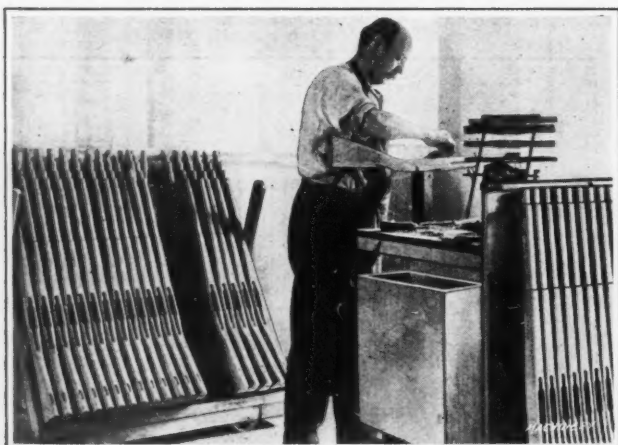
In manufacturing military rifle stocks, each stock must be finished so as to present a good appearance. In the United States arsenals special trucks are used to carry the finished rifle stocks to prevent marring finished surfaces
